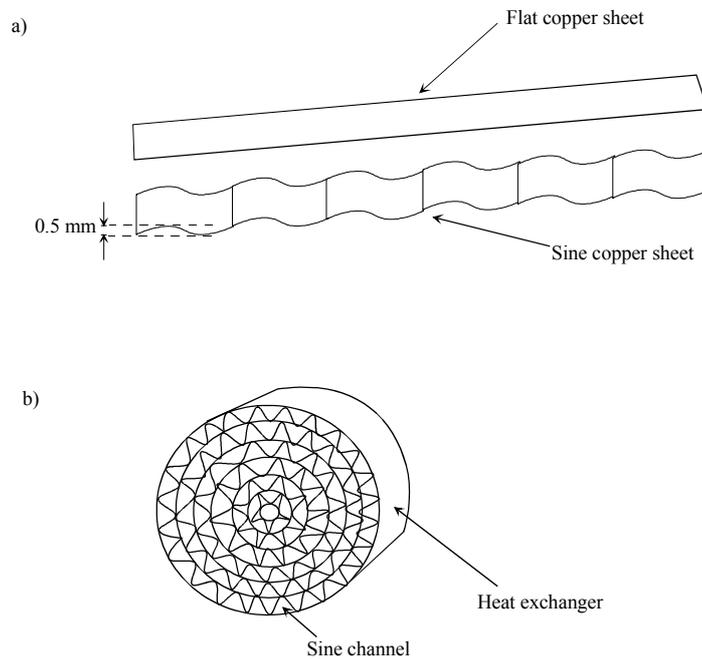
Illustration of the construction of the heat exchangers. a) Two copper sheets, one flat and the other with a sine shape, are rolled up together to realize a spiral structure with sine channels. b) Schematic view of the heat exchanger.
